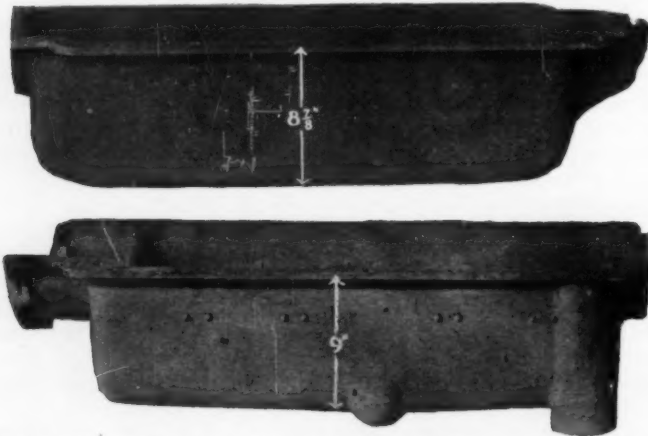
A CAST ALUMINUM CRANKCASE AND THE PRESSED-STEEL CRANKCASE THAT REPLACED IT
